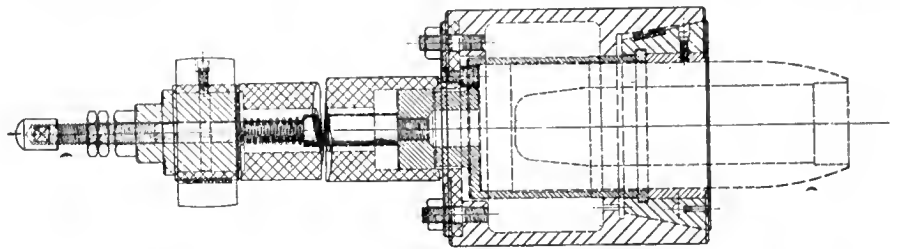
DRAW-BACK CHUCK FITTED TO NO. 5 SHELL BORING LATHE.
